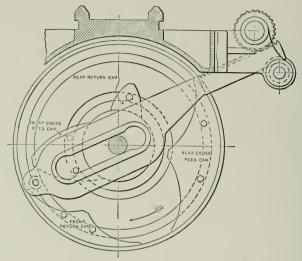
Cross-Slide Cams and Connecting Mechanism
